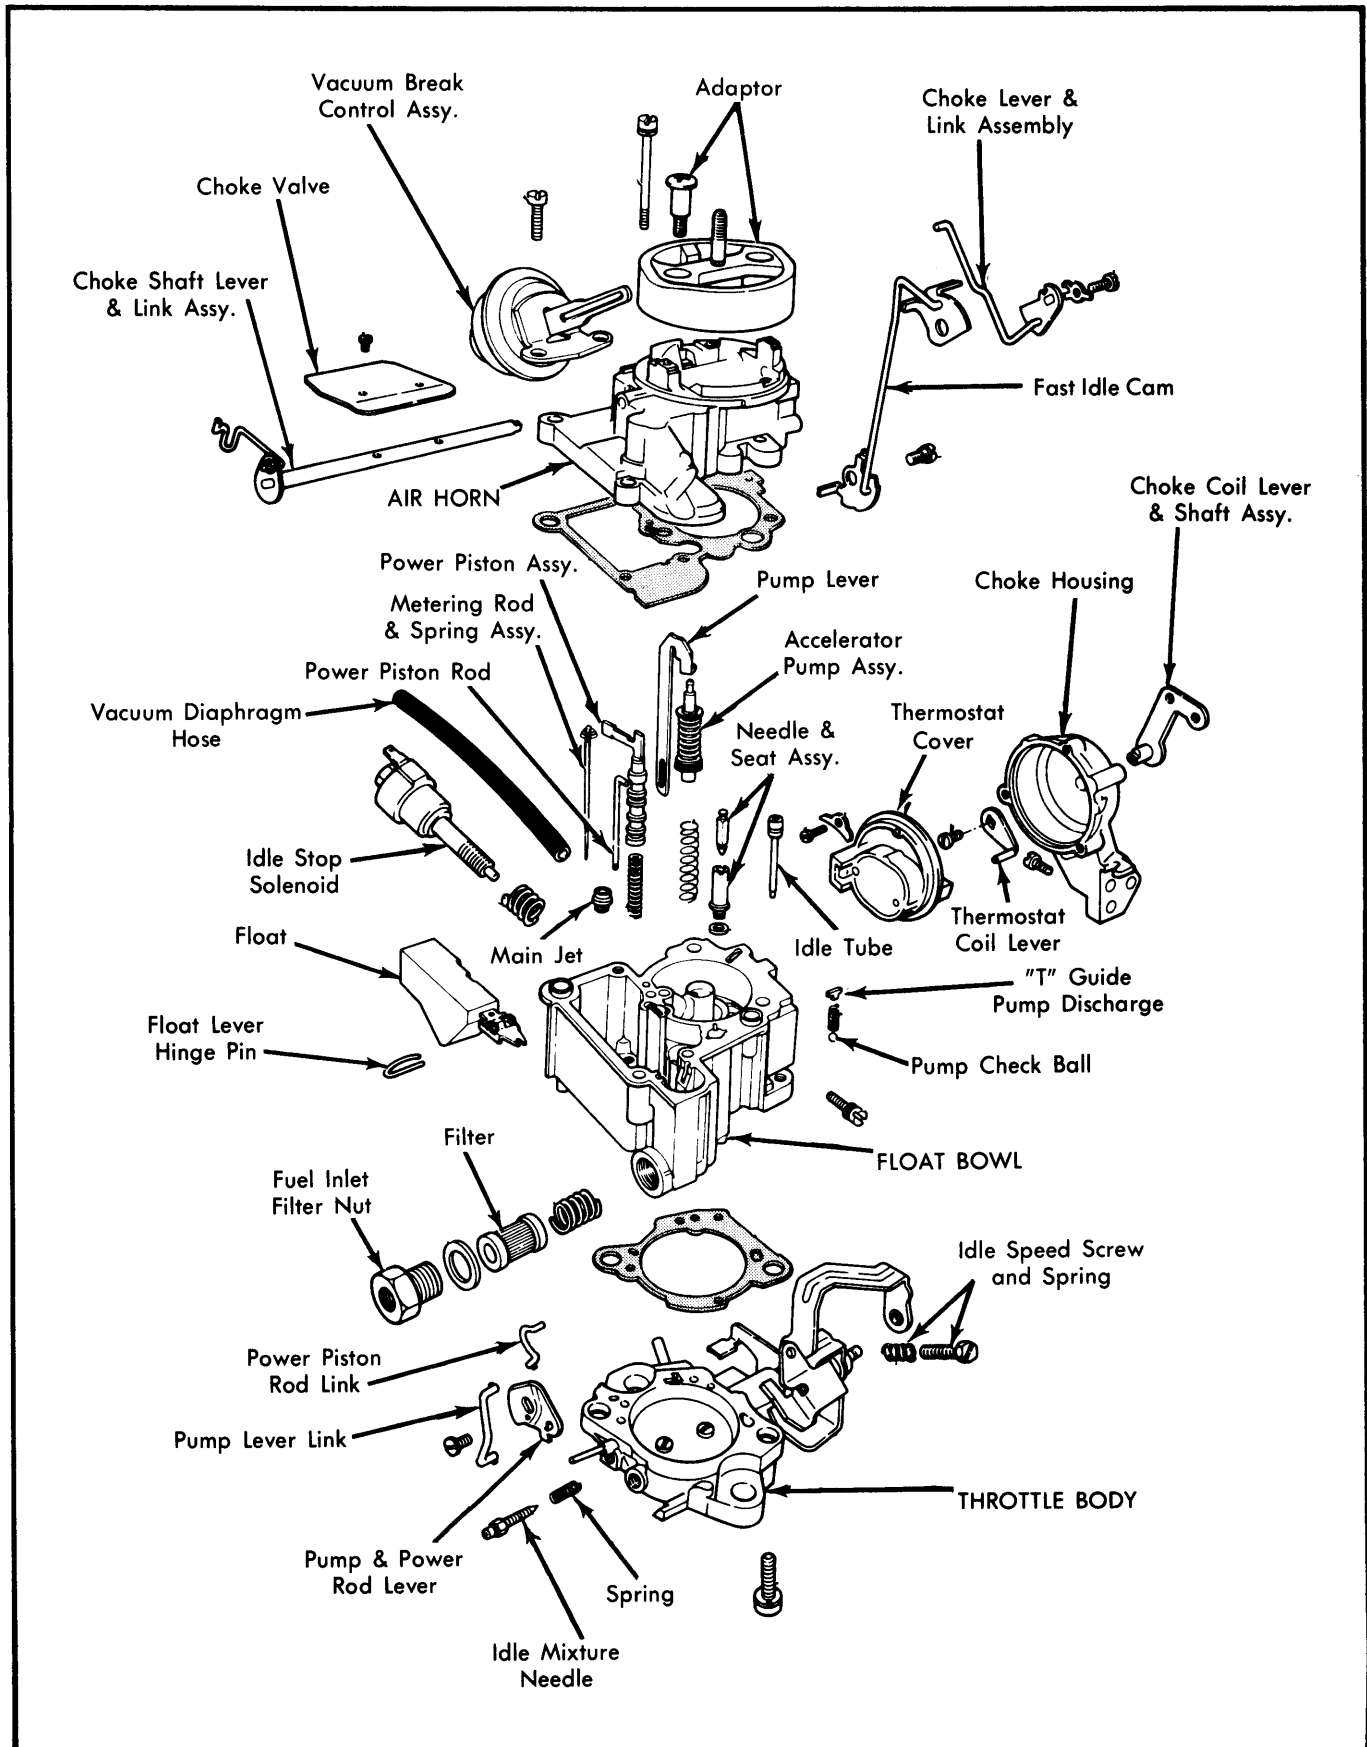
Exploded View of Rochester Model 1ME Single Barrel Carburetor
